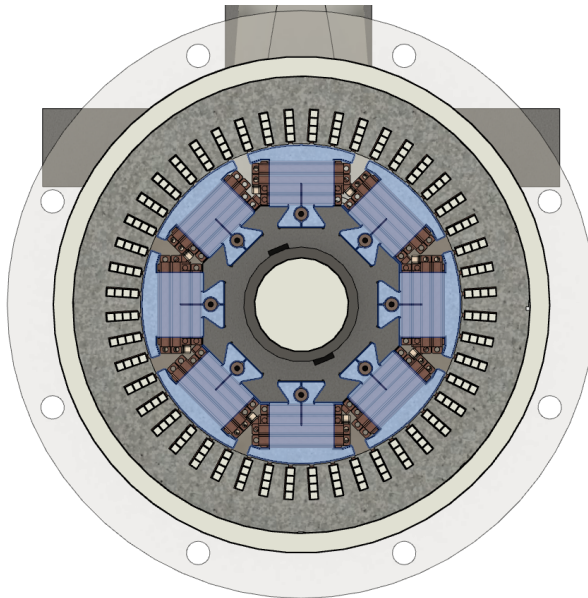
Transverse cross section of the 3D CAD model of the prototype, highlighting the rotor teeth in blue.
